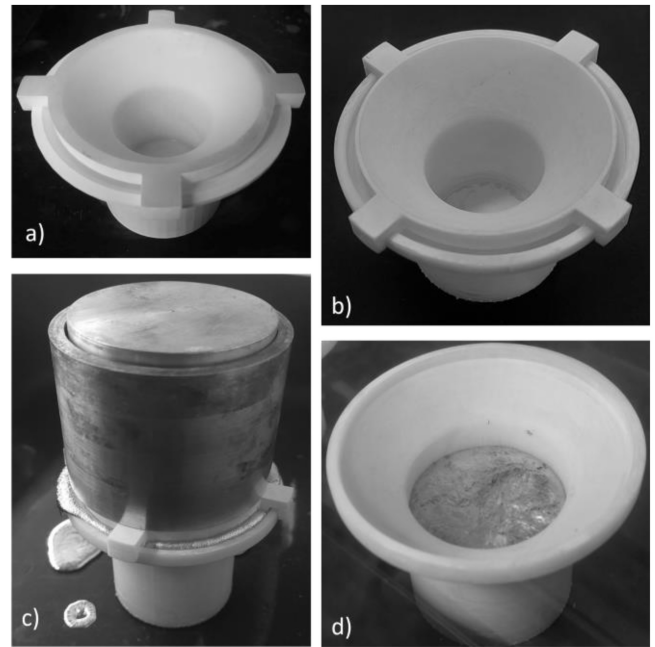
Metal cast conical horn molds and casting process - (a) The assembled mold used when fabricating via pouring the melted Sn-Bi alloy. (b) The assembled mold, with higher outer rim, used when melting the Sn-Bi alloy in the bottom mold. (c) Assembled mold with ceramic weight to keep the top half in place while cooling. (d) Sn-Bi alloy melted using the bottom mold as the crucible.
